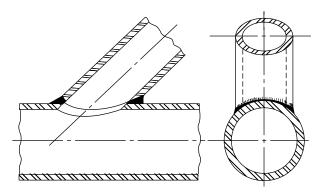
Typical Welded Angular Branch Connection Without Additional Reinforcement
